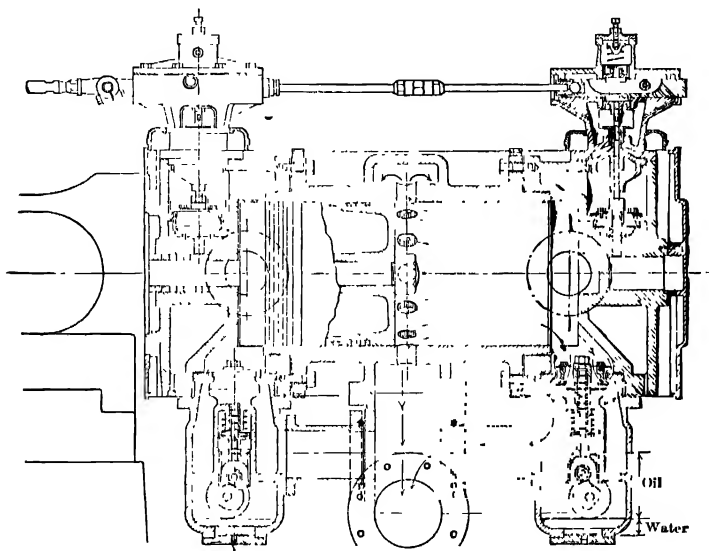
Ames "Controlled-Compression" Uniflow Engine.
